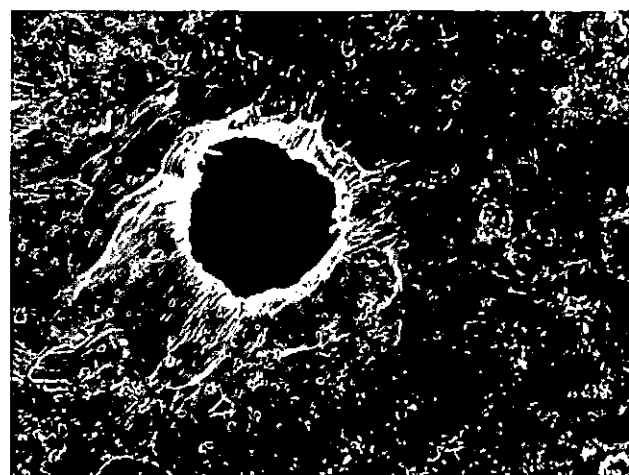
(F60296) Injector cup hole after wire brushing
